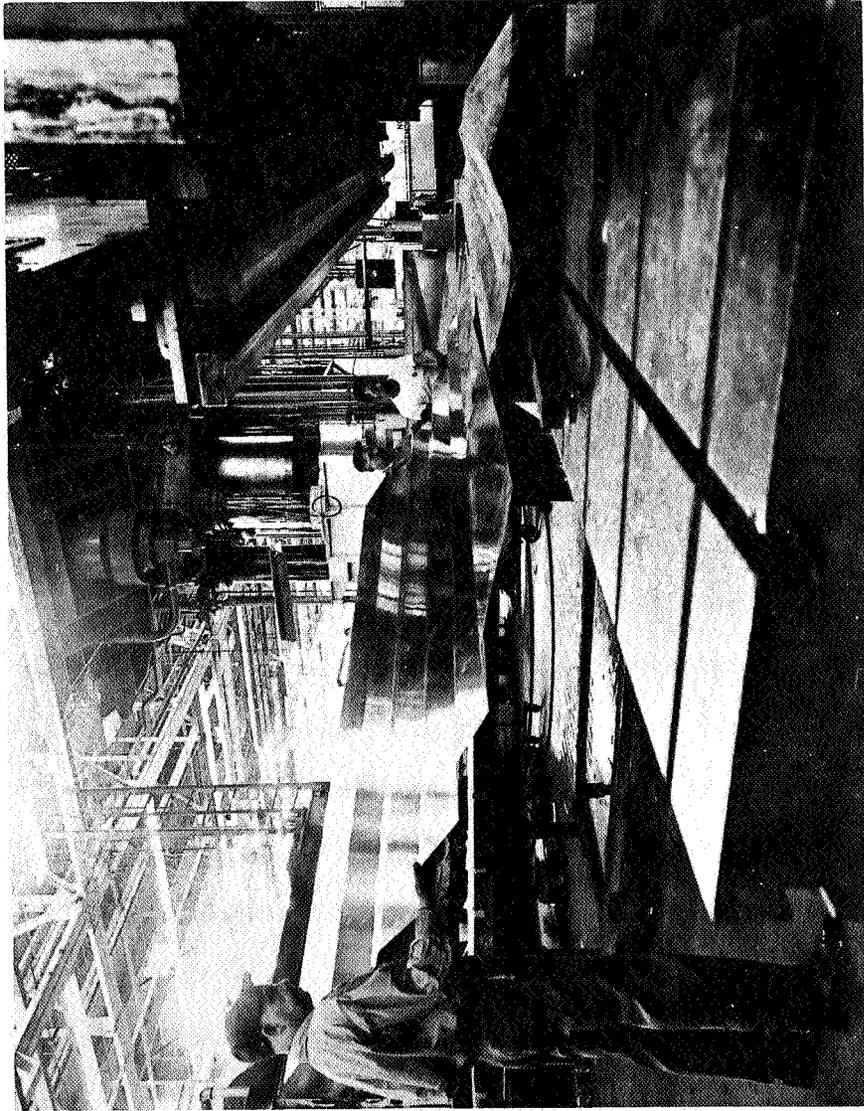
CORRUGATION OF LONG SHEETS OF TYPE 301 STAINLESS PRODUCED ON A 500-TON HYDRAULIC BRAKE PRESS WITH A 30-FOOT LONG BED
